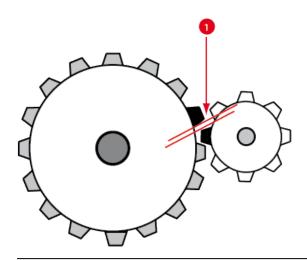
Mechanical system axis correction (① = slack in gearing)
